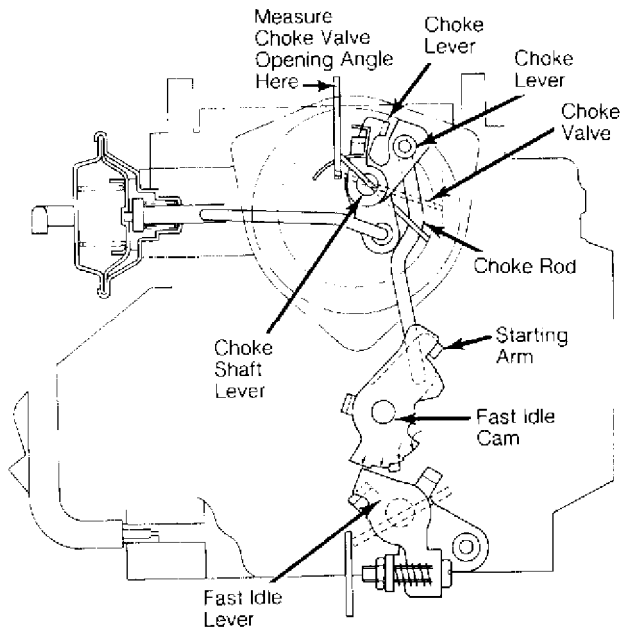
Adjusting Fast Idle Cam (Choke Opening Angle)
